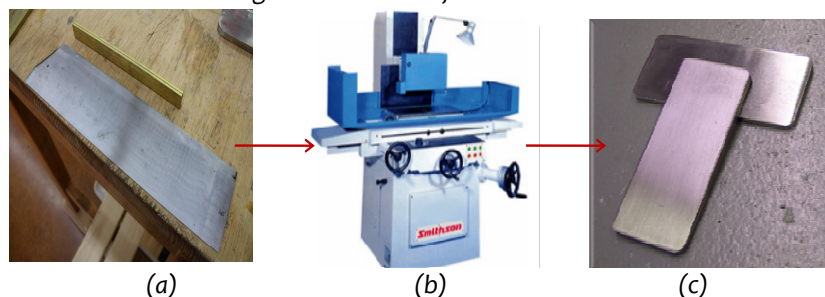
Work-piece preparation sequence: (a) Initial work-piece, (b) Surface grinding machine, and (c) Polished work-piece
